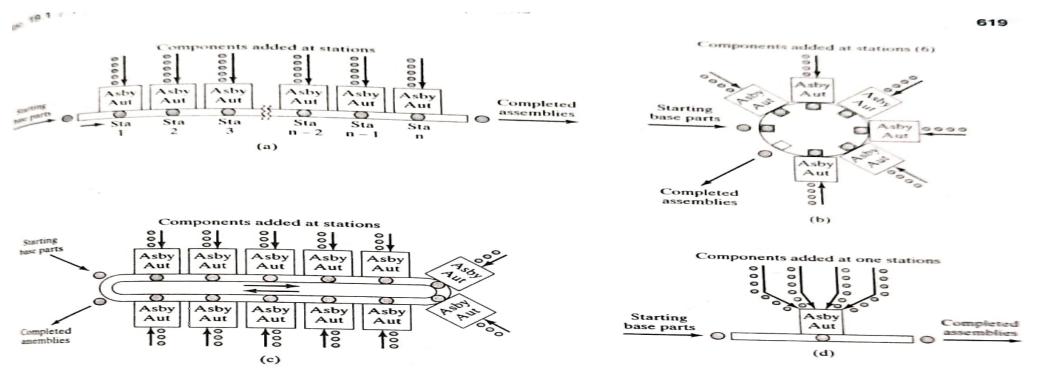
Types of automated assembly systems: (a) in-line, (b) dial-type, (c) carousel, and (d) single station.
